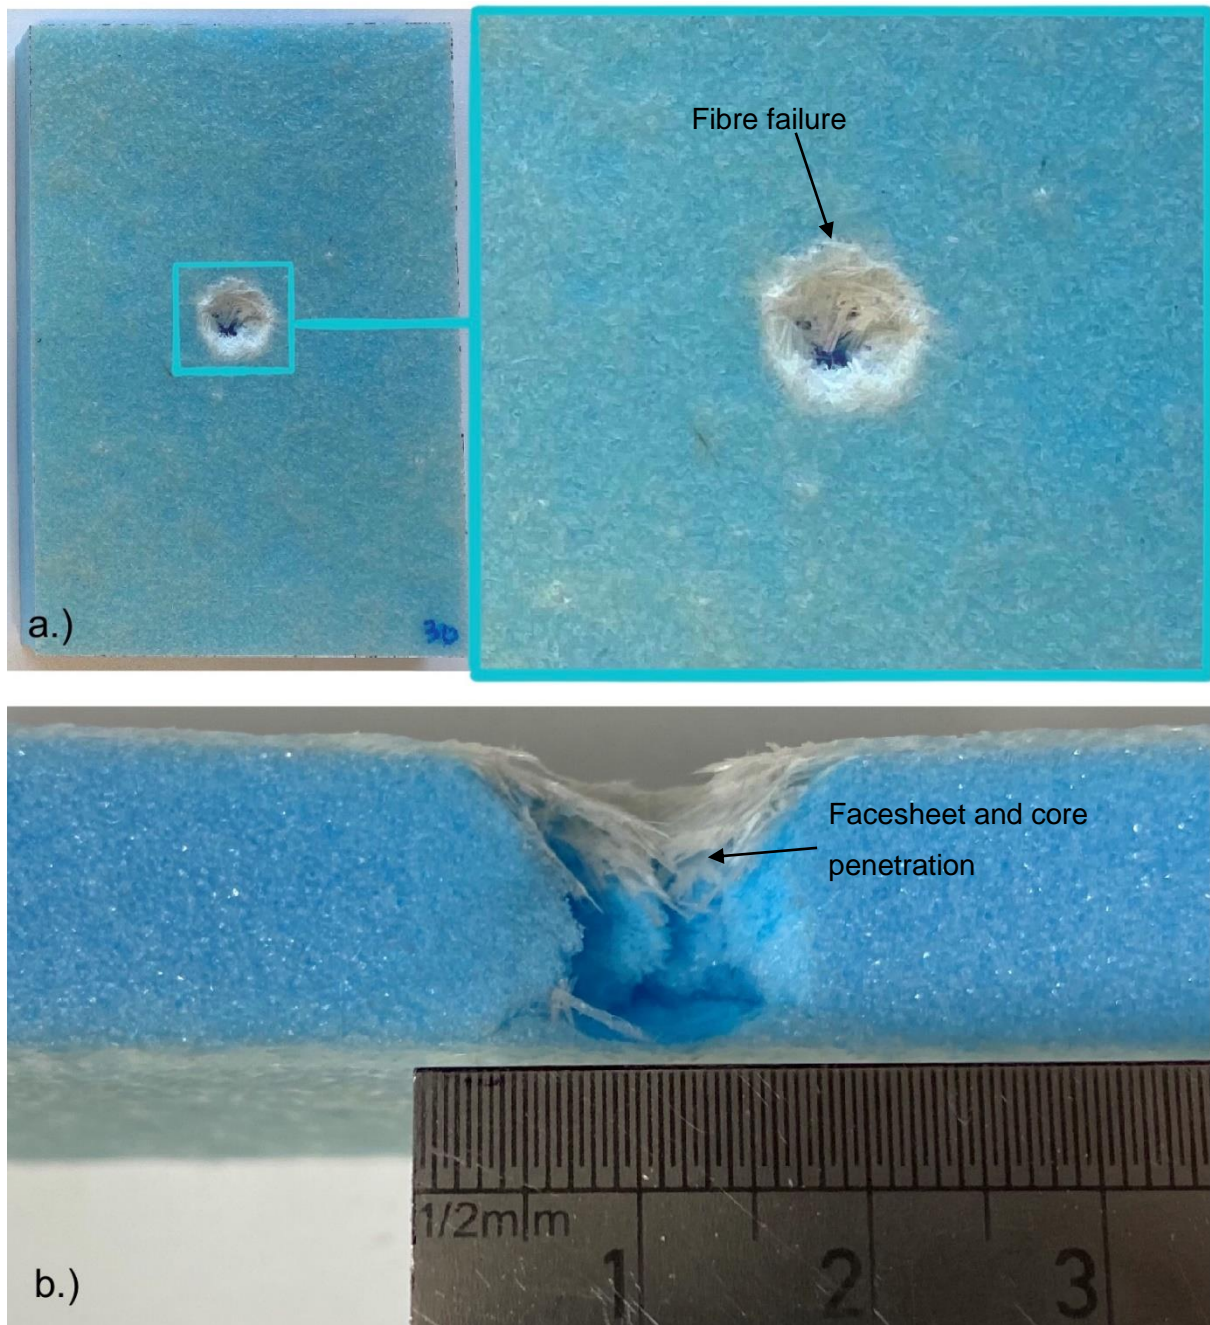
Top facesheet view and b.) cross sectional view of impacted CSMG specimen at 30 J. In Figure 4.20, At 30 J the GSMG-SI-3 exhibited facesheet and core penetration. However, the damage area of the impact zone appears smaller than that of the RCF panels at 20 J and 30 J as it came out to be approximately 16 mm. The bottom facesheet exhibited slight indentation failure. The force-displacement curve for RCF-SI-3 and CSMG-SI-3 are presented in Figure 4.21. Similar penetration damage has been reported by H. Wang et al [56] experimentally and analytically investigating low-velocity impact penetration of the fully clamped foam-core composite sandwich panels.
